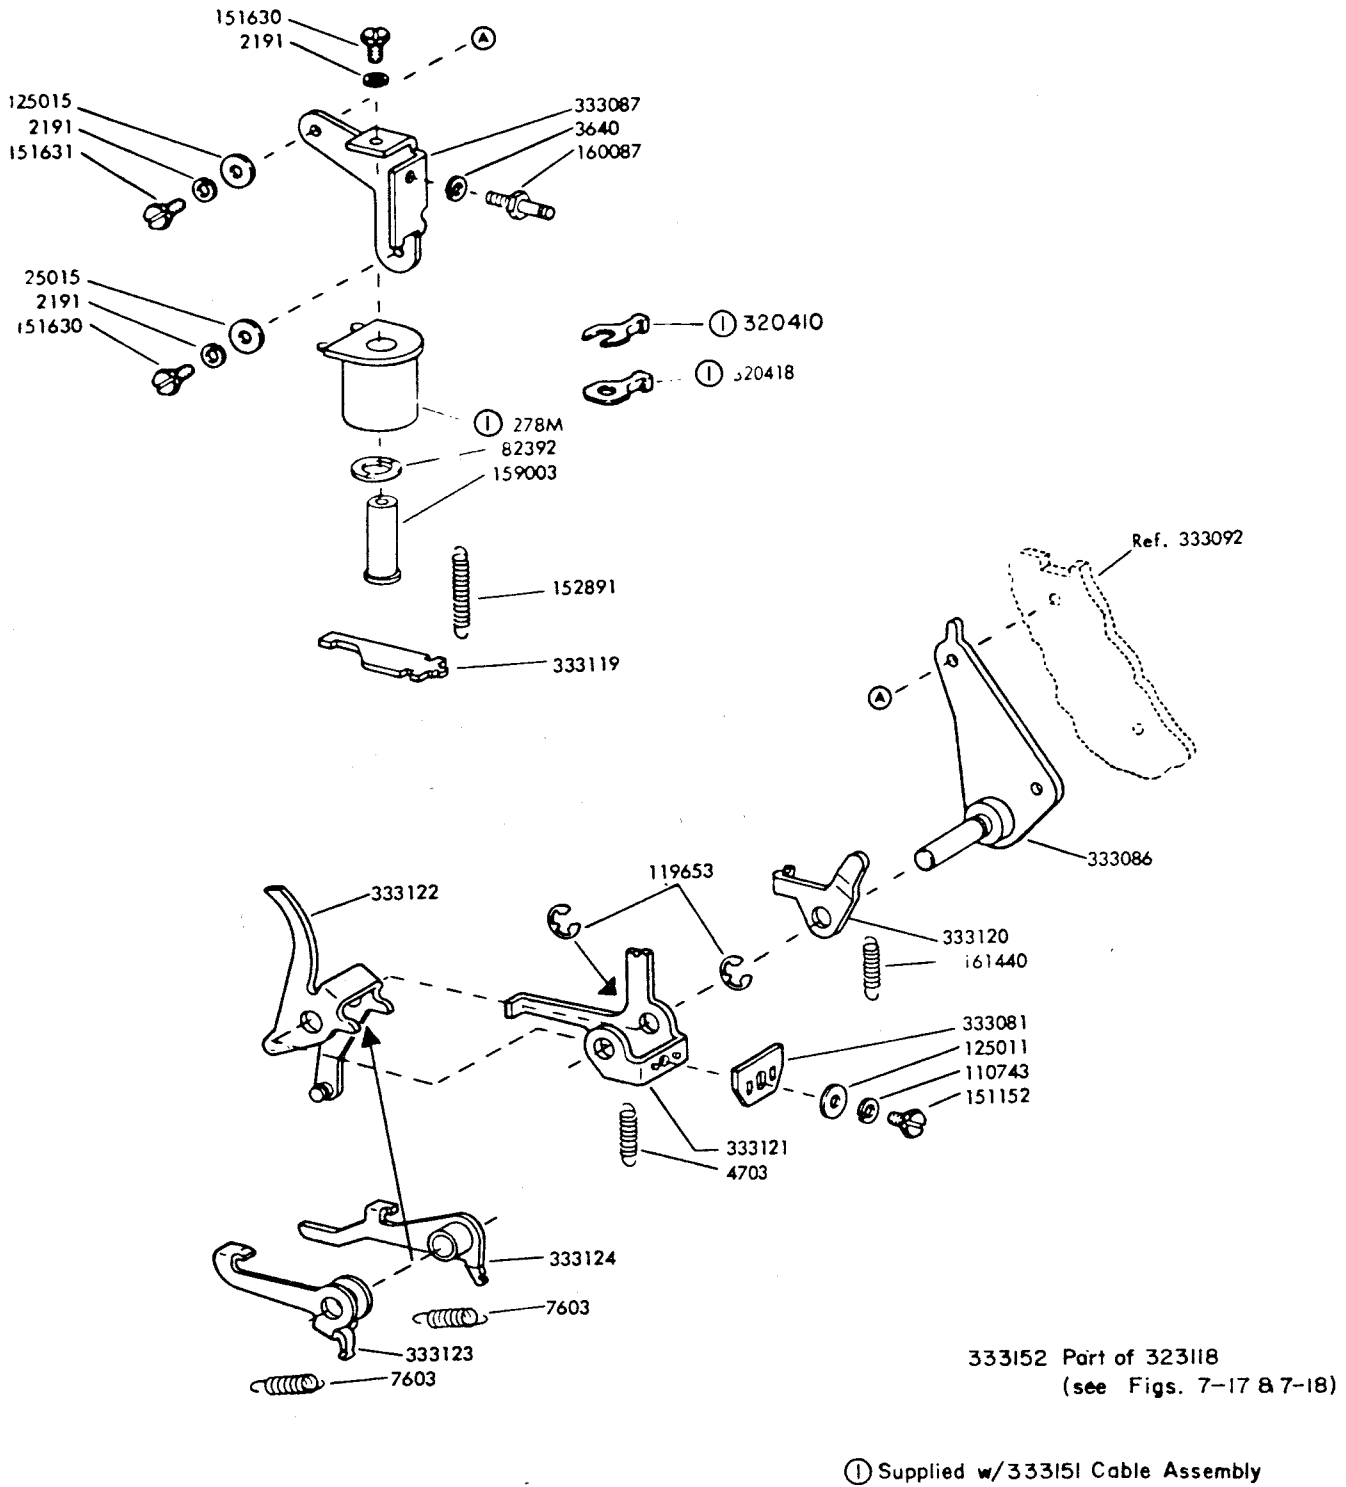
333152 Distributor Clutch Trip Assembly - Used on Low-Level Sets
